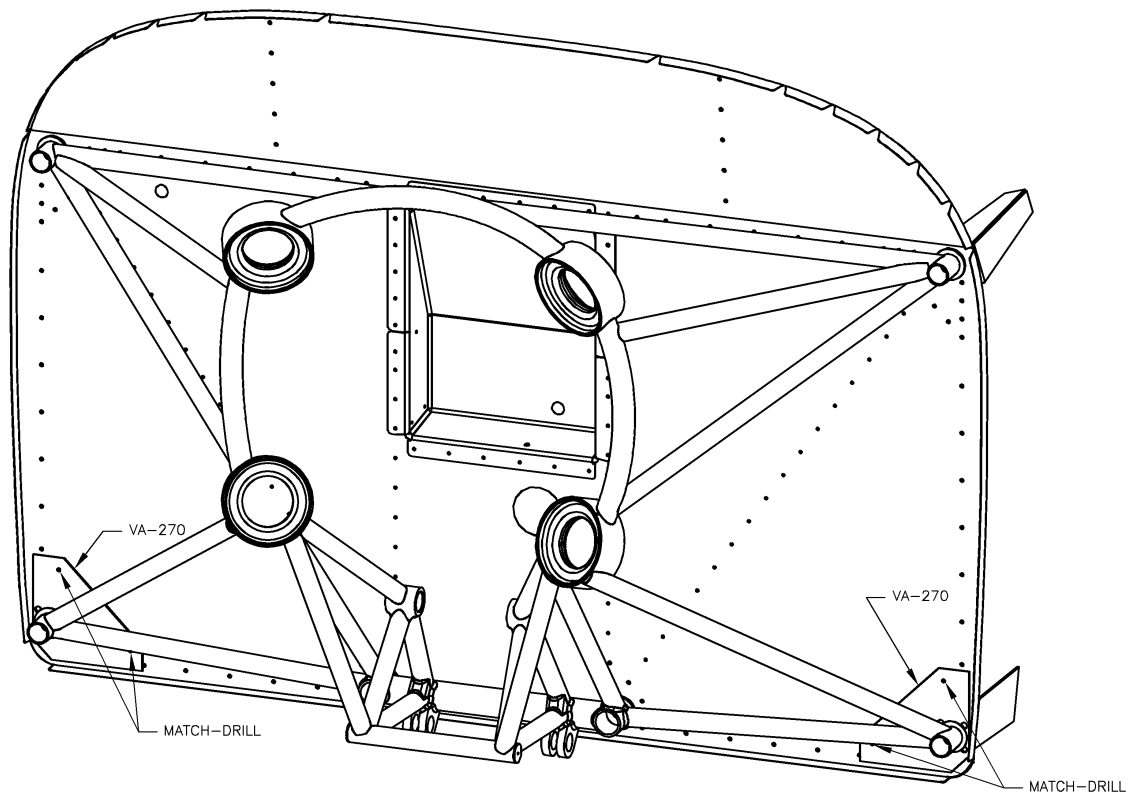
DRILL OUT FIREWALL RIVETS
